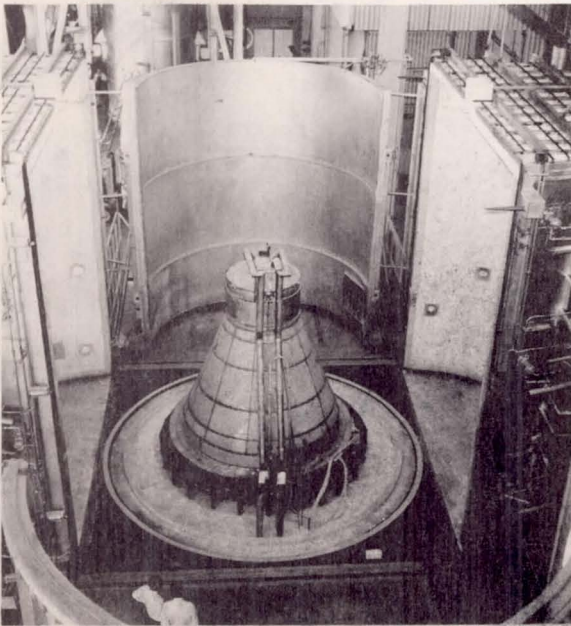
F-1 clamshell furnace. (Courtesy Rocketdyne.)
